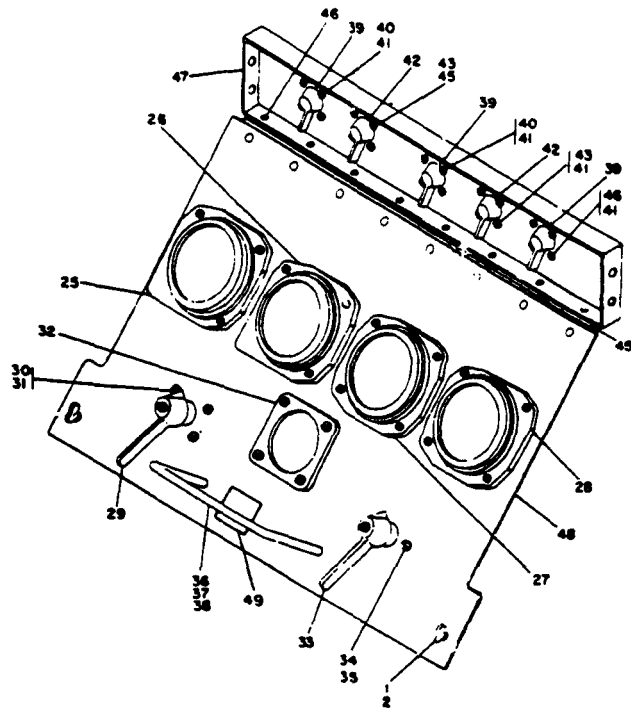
Instrument Panel Assembly (Sheet 1)
